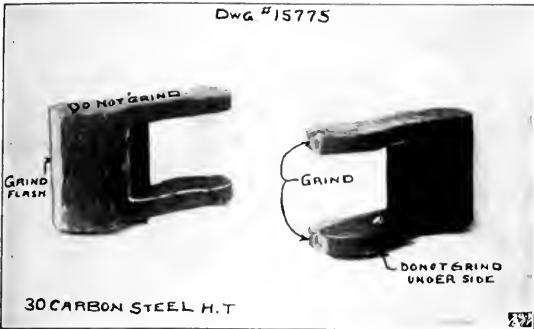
Forging with "Do Not Grind" Surfaces to be finished in a Subsequent Operation
